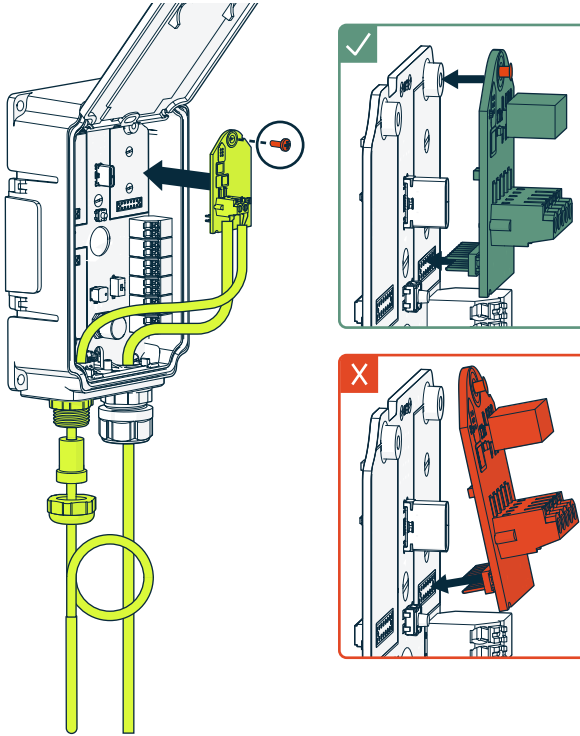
Installing and wiring TMM10 temperature measurement module, example
